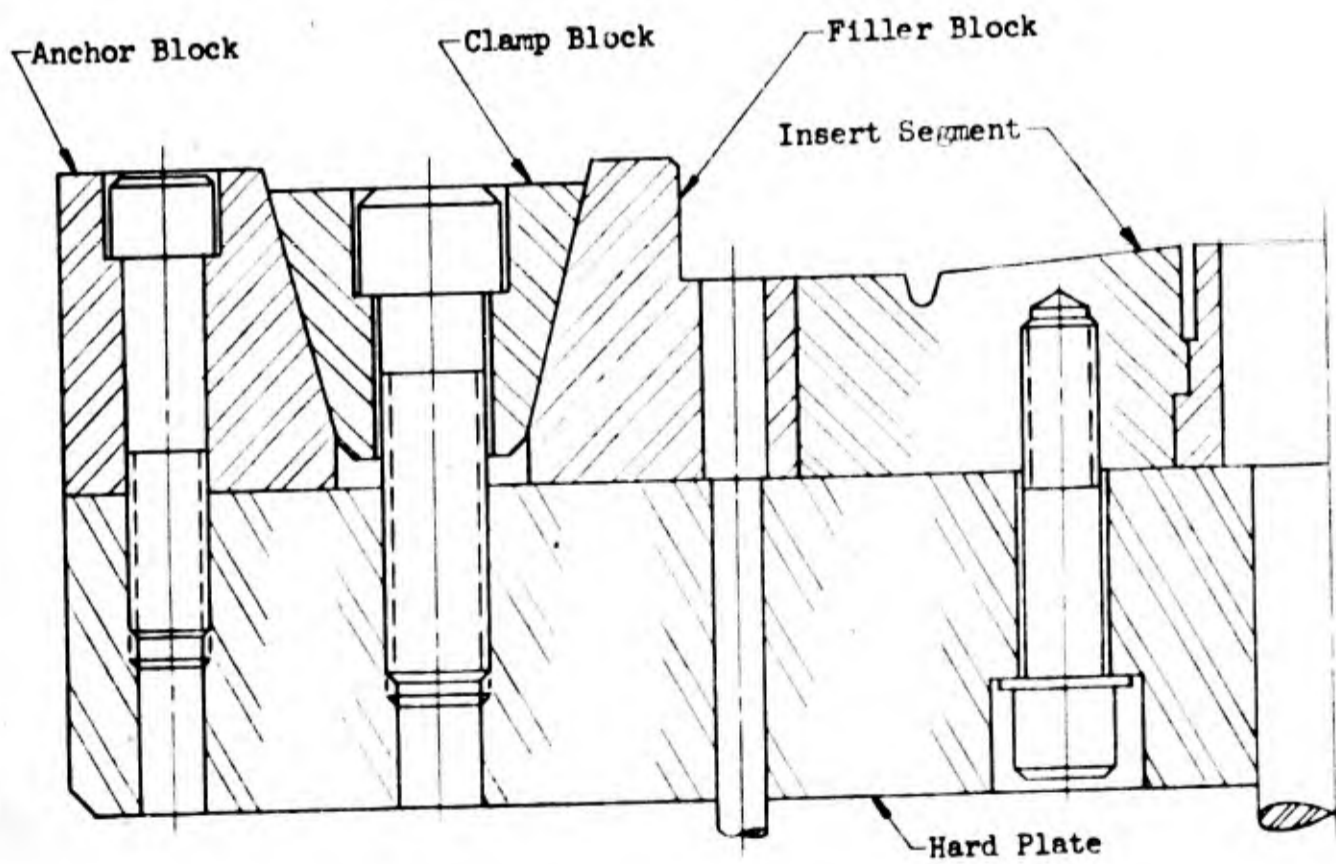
BOTTOM DIE INSERT SEGMENTS AND CLAMPING ACTION
